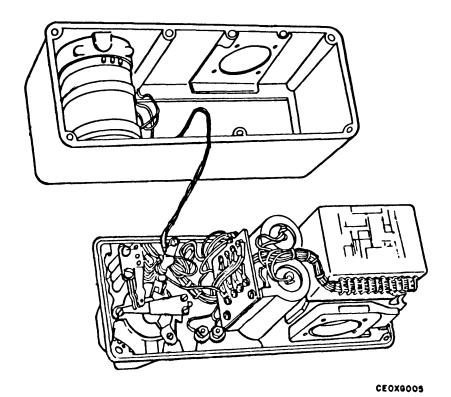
TA-312/PT with panel assembly removed from housing.
